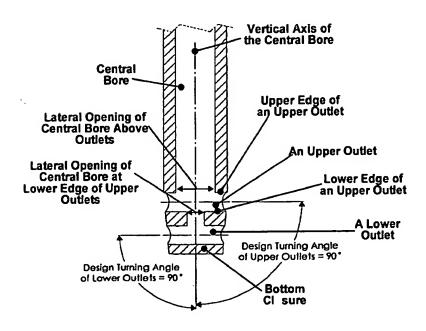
Section View of a First Embodiment of a Casting Nozzle of the Invention
